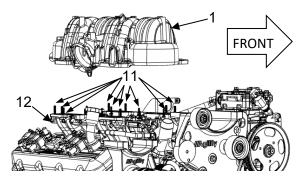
Upper Intake Manifold (1) with Upper Manifold Retaining Bolts (11) and Lower Intake Manifold (12).
